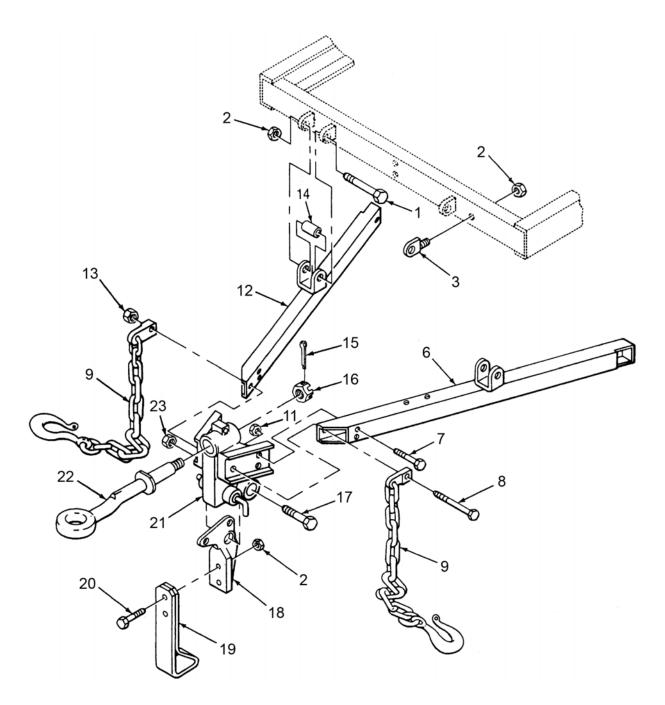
Drawbar Assembly and Safety Chains (Sheet 1 of 2)
